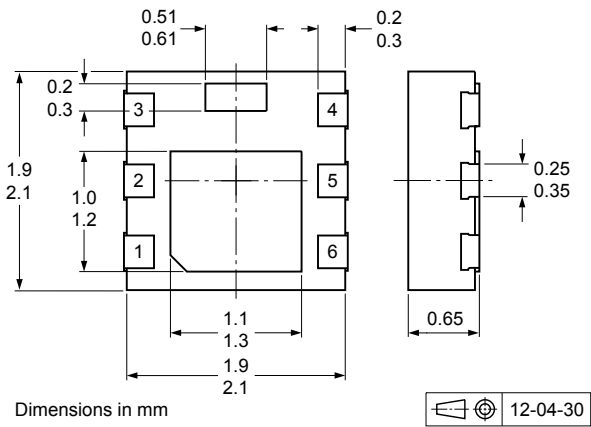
Package outline DFN2020MD-6 (SOT1220)
